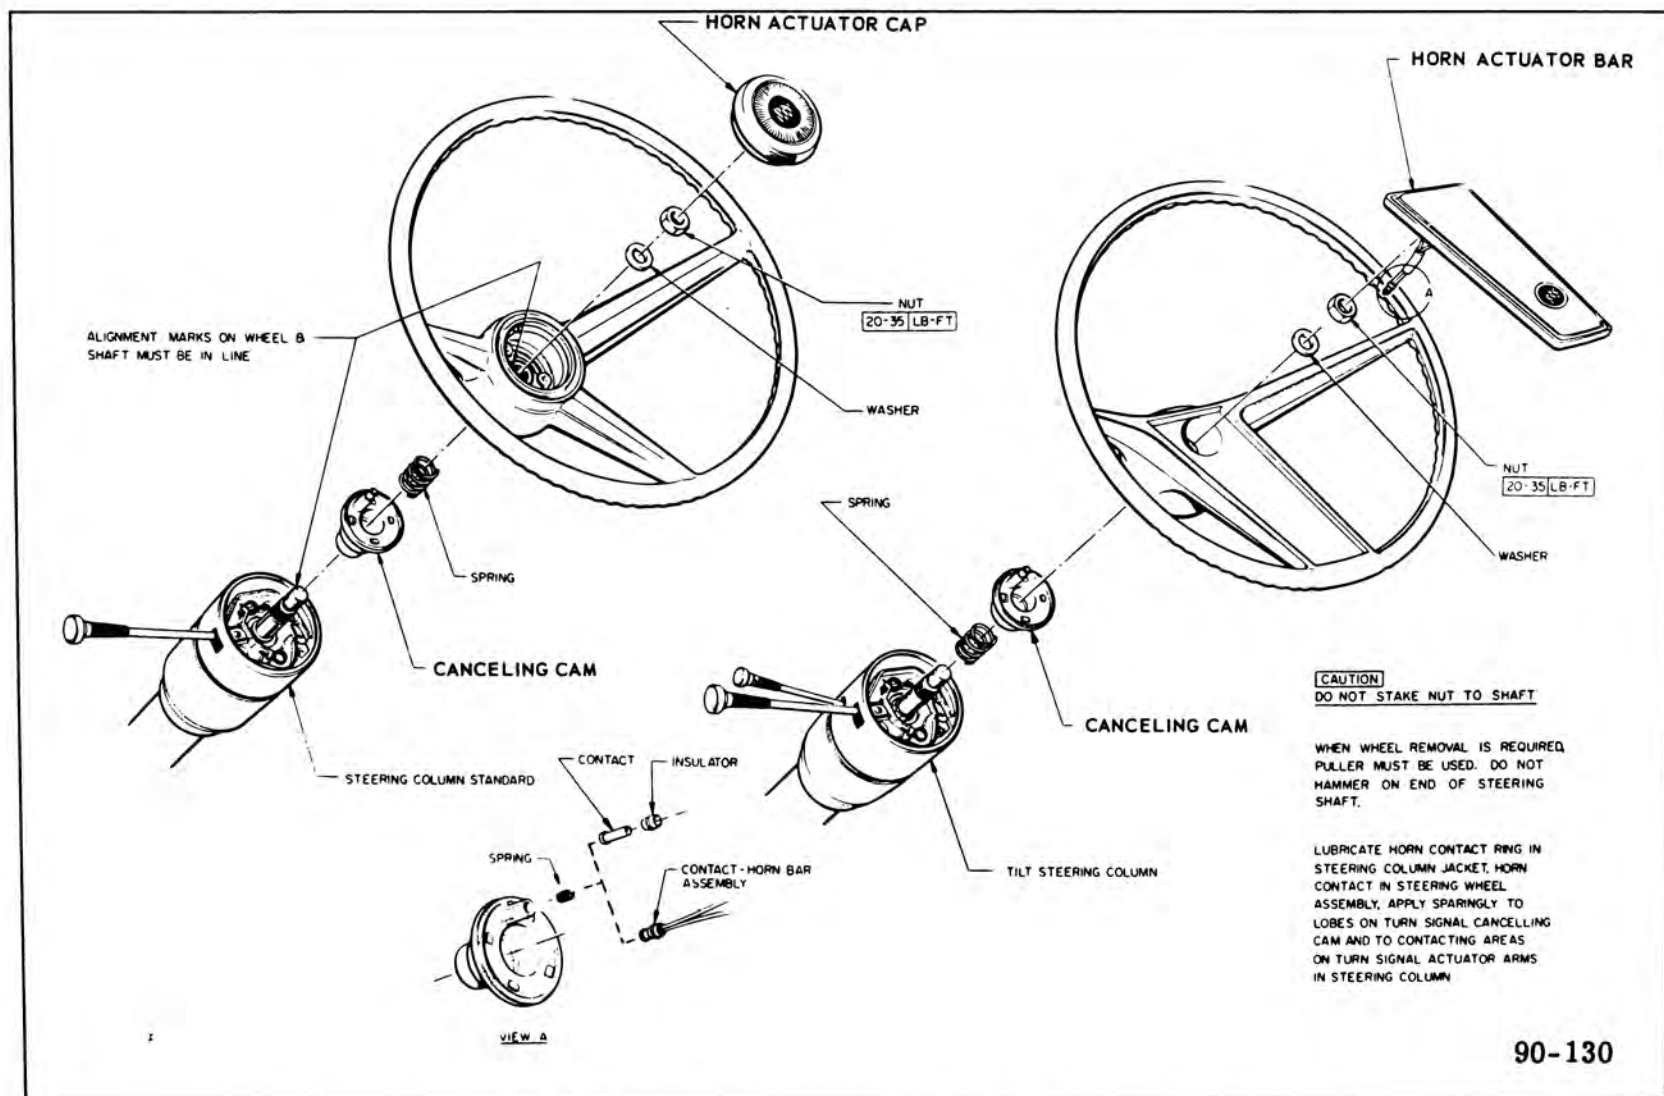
Steering Wheel Installation (43-44000 Series)
